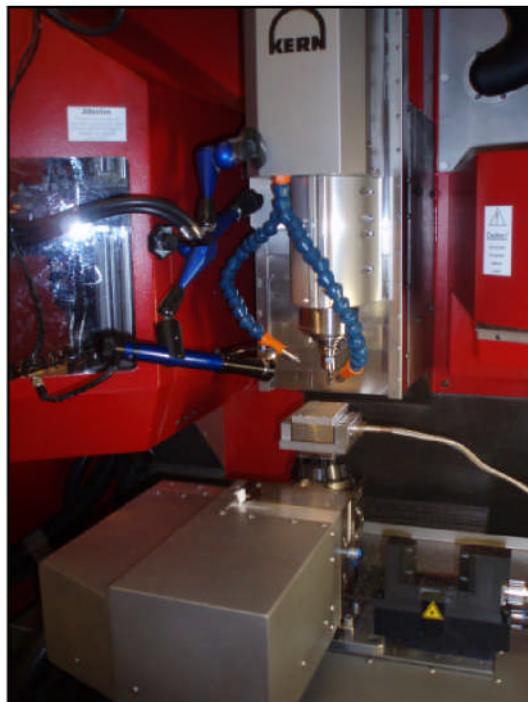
Kistler microdynamometer in the Evo Kern CNC machining centre
